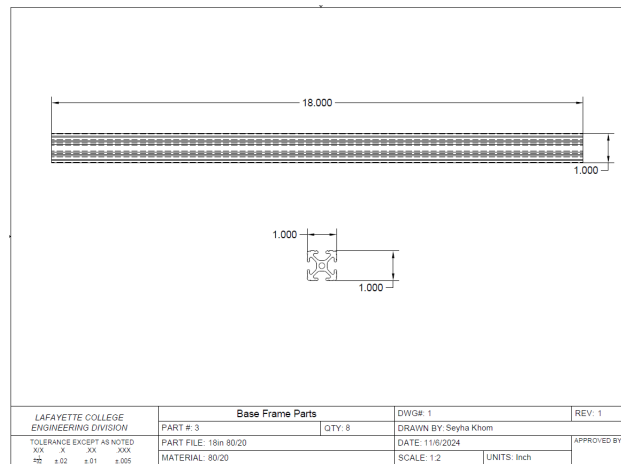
This is a drawing sent to the machine shop. This drawing is requesting from the machine shop to cut 80/20 that is 1 inch by 1 inch in size. There are eight pieces cut at 18 inches long. These pieces are used for the front and back of the box containing the electronics.
